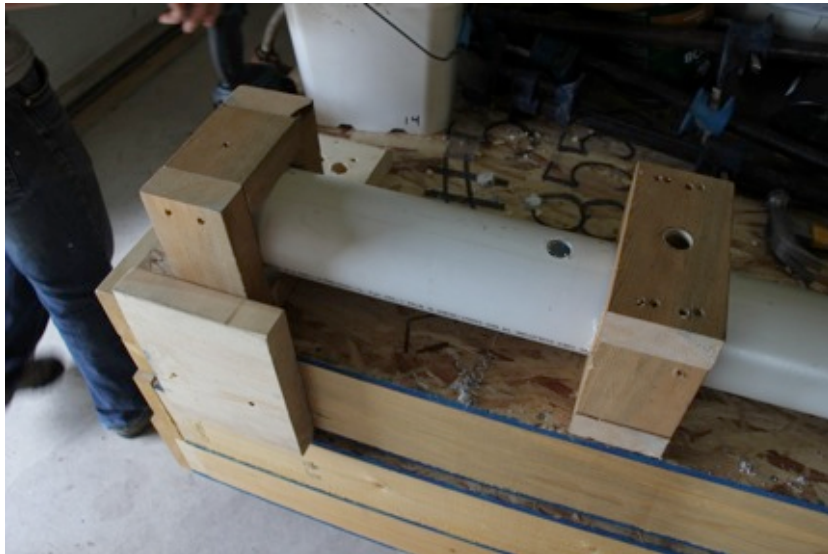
Jig for Accurate Drilling of Holes in PVC Tubes
